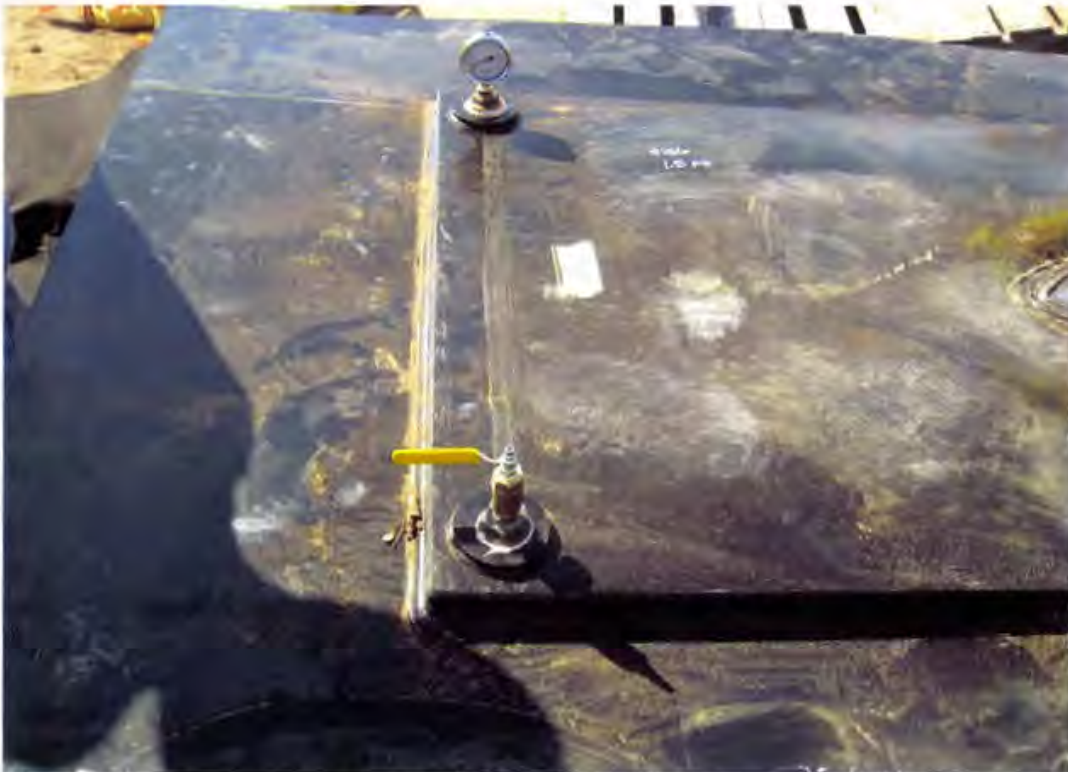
The 1-inch void between flatstock plates of the pipe penetration assemblies are air pressure tested to verify factory welds prior to installation
